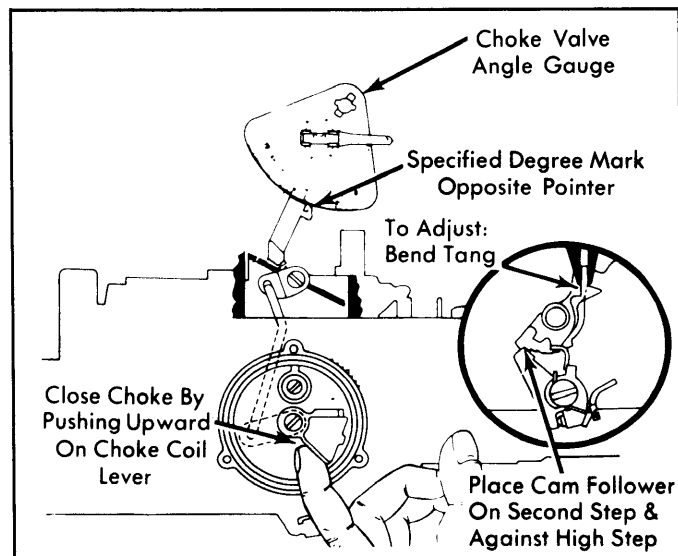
Adjusting Choke Rod (Fast Idle Cam)
